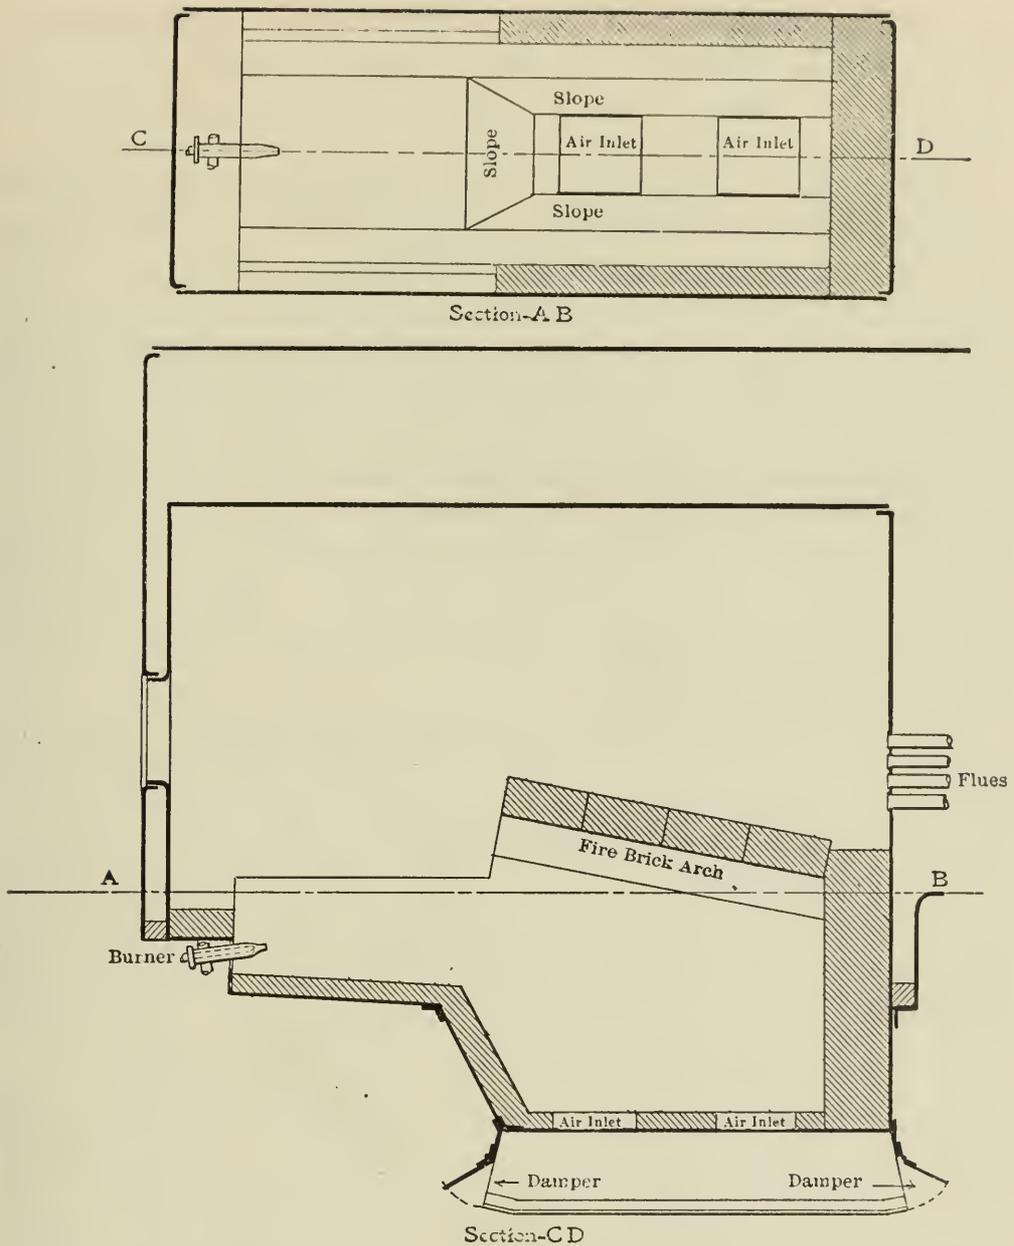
SECTIONAL PLAN AND ELEVATION OF FIRE-BOX OF OIL-BURNING LOCOMOTIVE.
